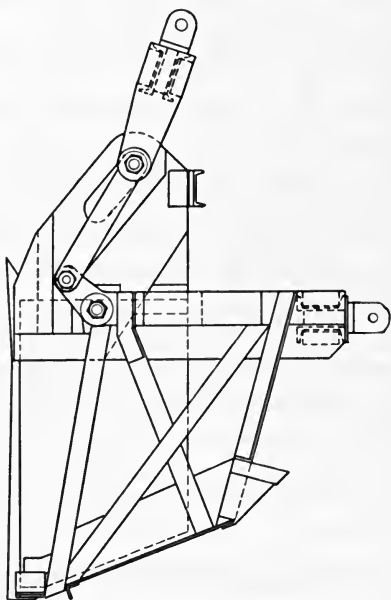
Shnablen drag-line bucket. (Courtesy of Brown Hoisting Machinery Co.)
